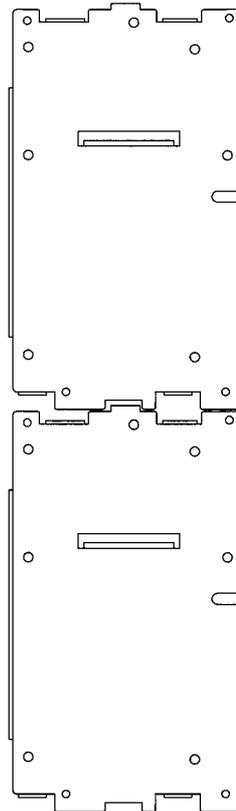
Attaching the Expansion Wall Mount Bracket to the Basic Wall Mount Bracket
